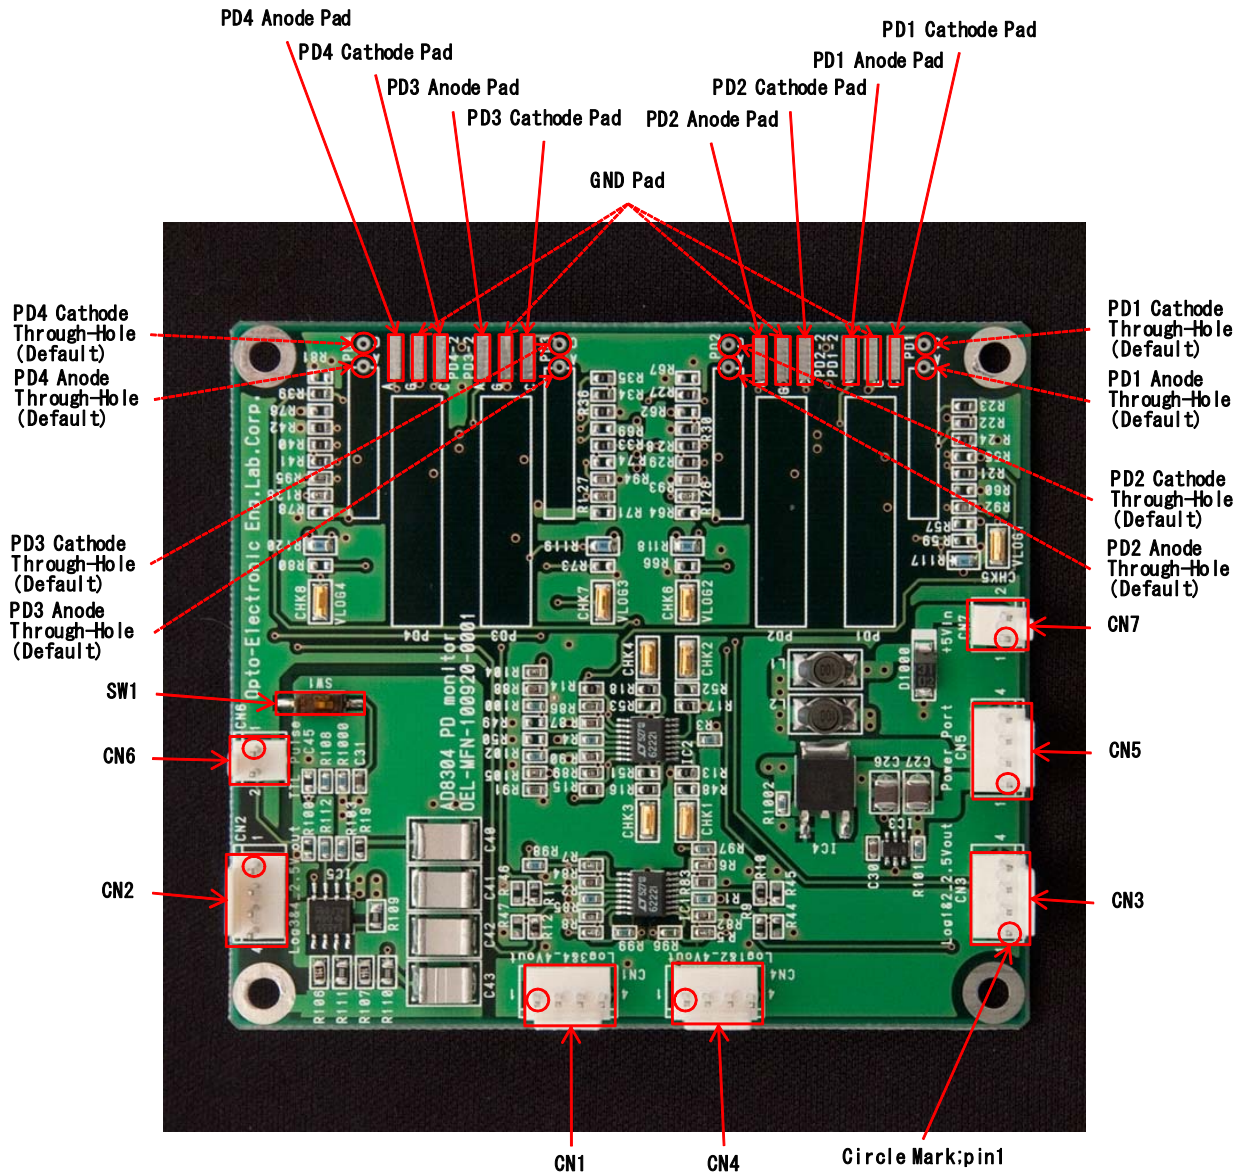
Connector Layout, Pads Layout, Through-Hole Layout
